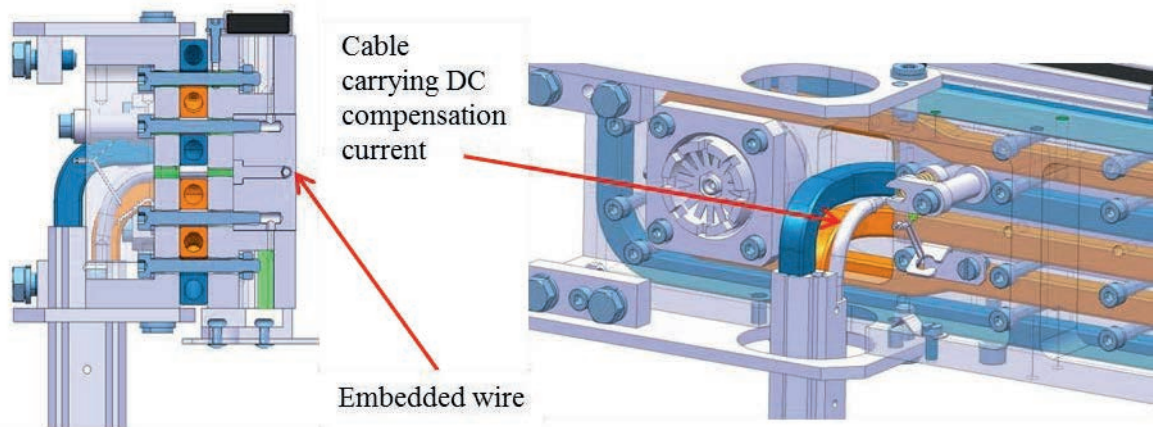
Technical drawing of the wire-in-jaw collimator design.
